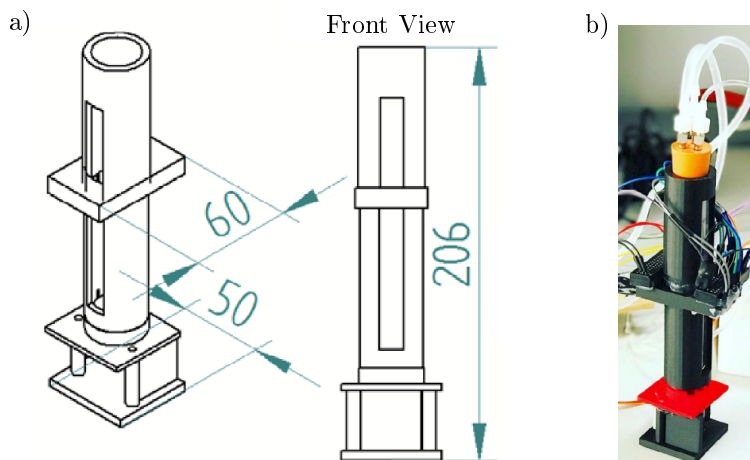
3D printed Chamber support. a) CAD model of the chamber support. Size (reported in mm) is optimised for PYREX Rimless 25x200mm test tubes. b) Assembled chamber support, with the stirrer motor mounted at the bottom, prototype of the optical density circuit and tube connections at the top. In this first prototype, for testing purposes, the prototypal optical board has been glued onto the camber support loosing its sliding properties.
